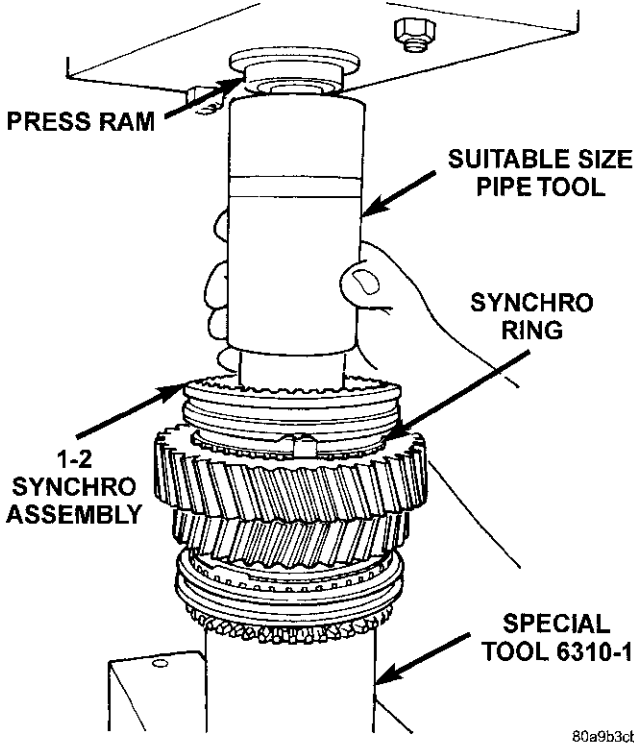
Pressing 1-2 Synchro Assembly Onto Output Shaft
